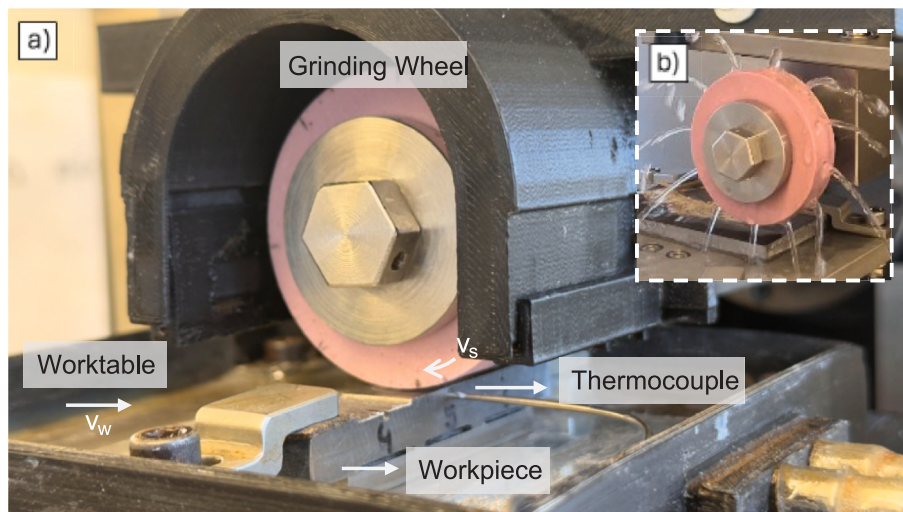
Experimental grinding setup: (a) side view highlighting the grinding wheel, worktable, workpiece, and thermocouple position. Arrows indicate the directions of the grinding wheel rotation (V_s) and table feed (V_w); (b) frontal view detailing the fluid supply configuration for wheels with internal channels.
